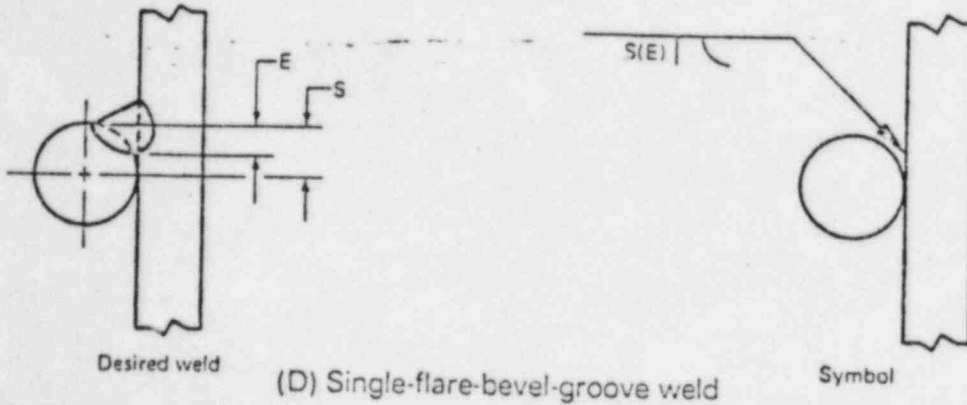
Application of flare-bevel- and flare-V-groove weld symbols
